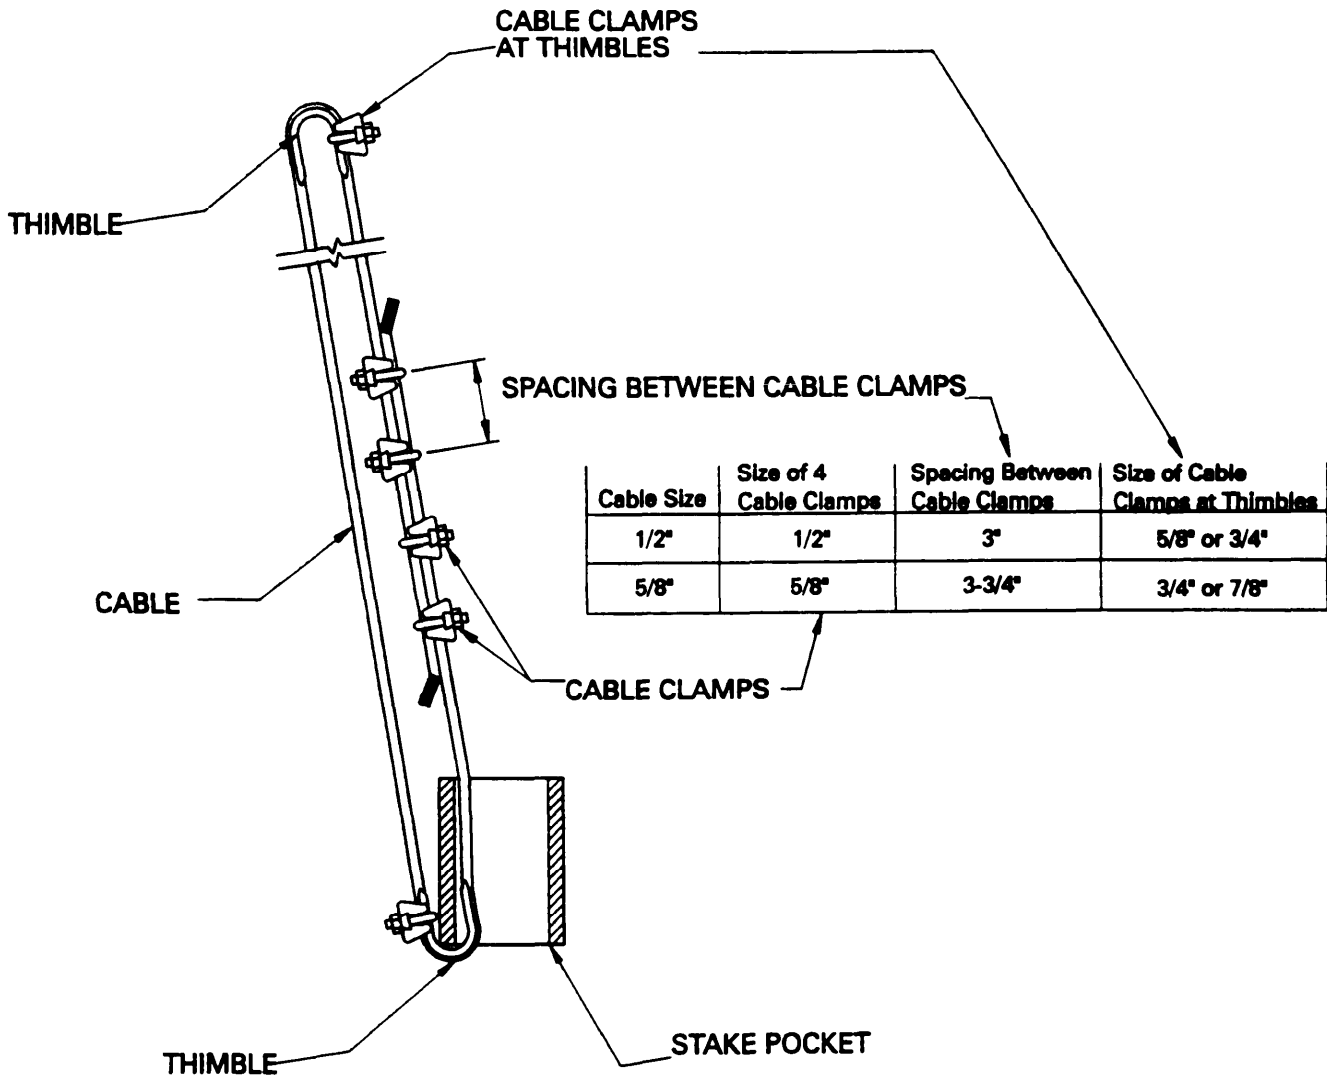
Detail of a cable assembly for rail transport. (Table 3-2 and table 3-3)
